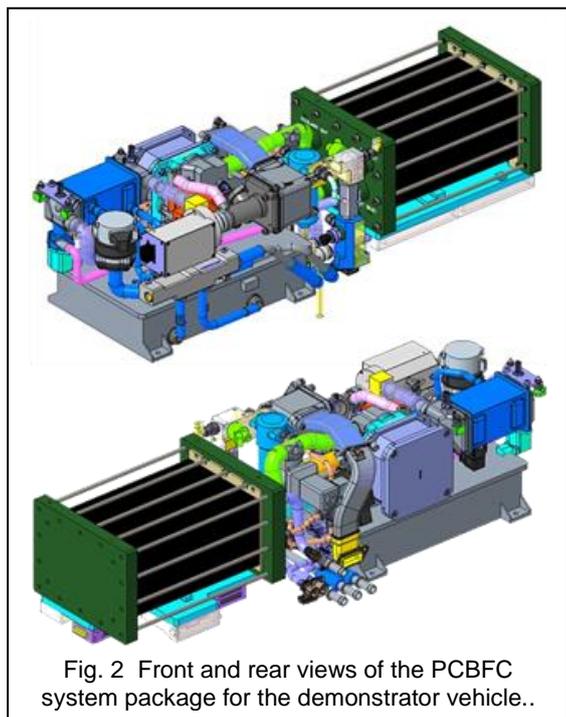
Front and rear views of the PCBFC system package for the demonstrator vehicle..
